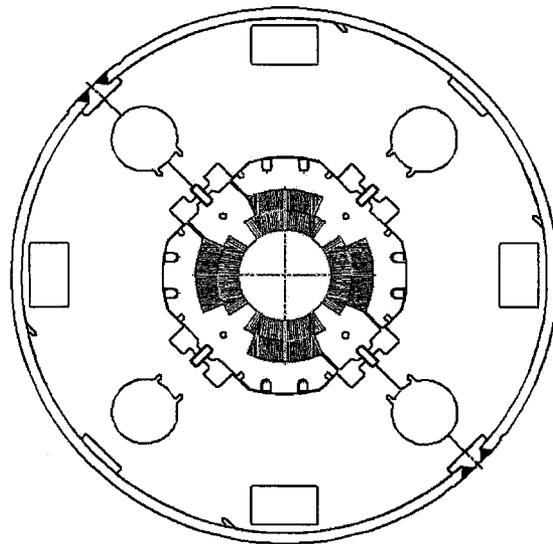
Magnet cross-section. The coil bore diameter is 70 mm and the skin outside diameter 416 mm.
